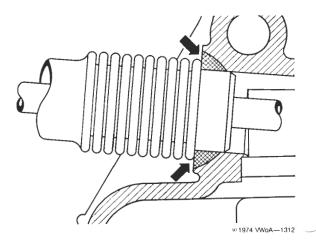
Rubber seals correctly positioned (single-carburetor engine).
